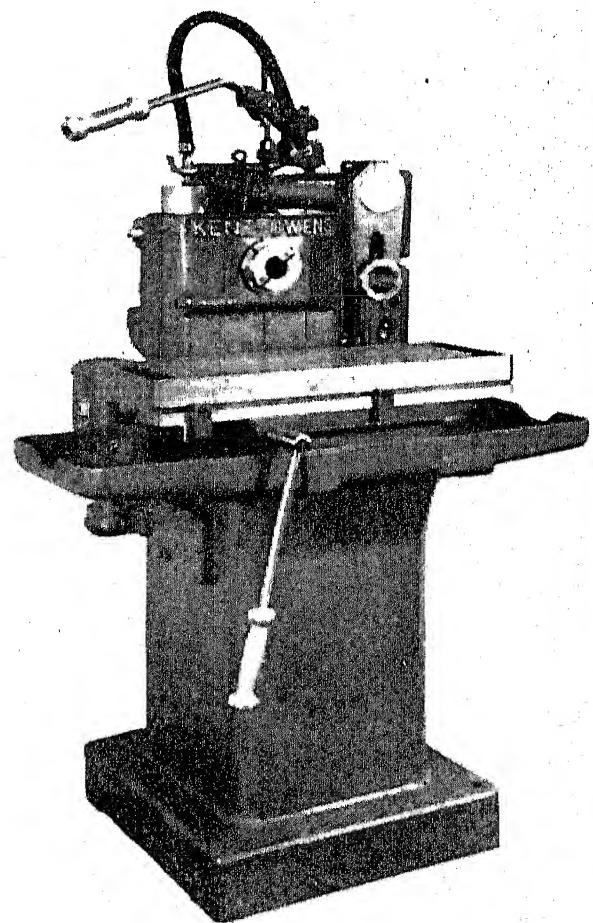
A No. 1-M hand milling machine. (Courtesy Kent-Owens Machine Co.)
